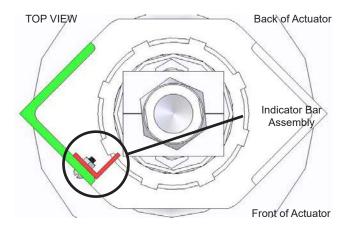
Top View of Indicator Bar Assembly (Cylinder and Spring Cartridge hidden for clarity)
